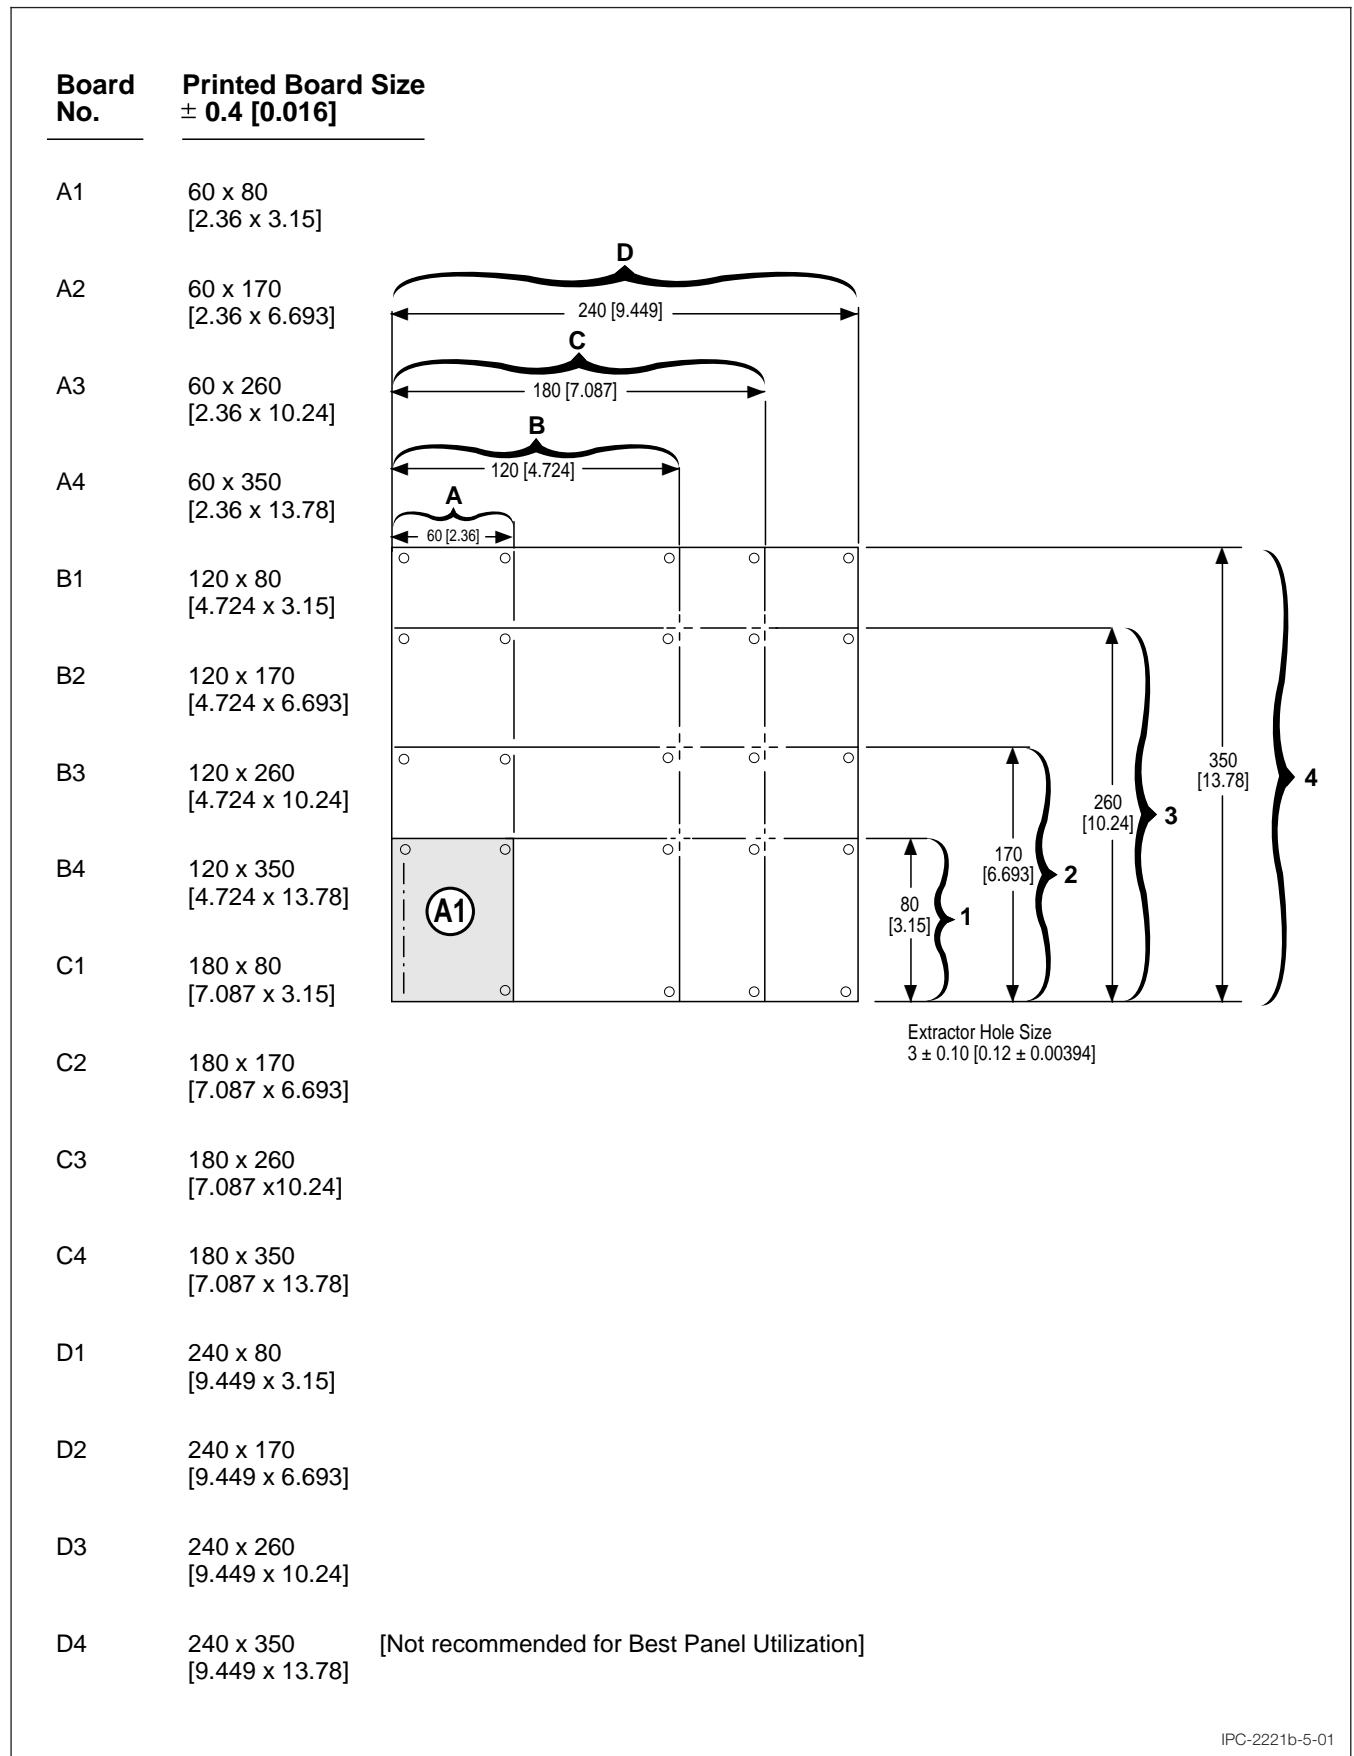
Example of Printed Board Size Standardization, mm [in]
